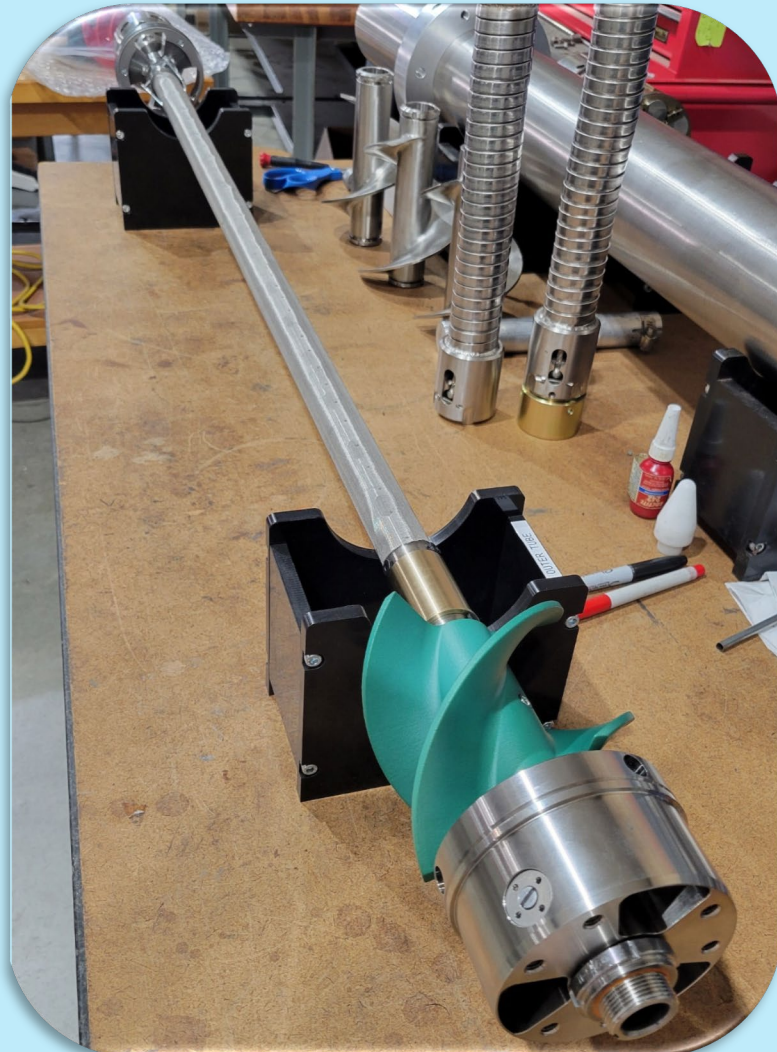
A hollow shaft assembly configured for wet drilling, including chip filtration screen and 3d printed booster (green).
